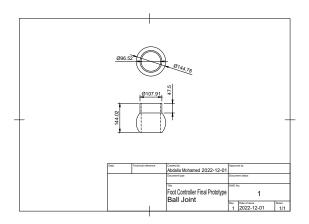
Foot Controller Final Prototype Ball Joint Technical Drawing
